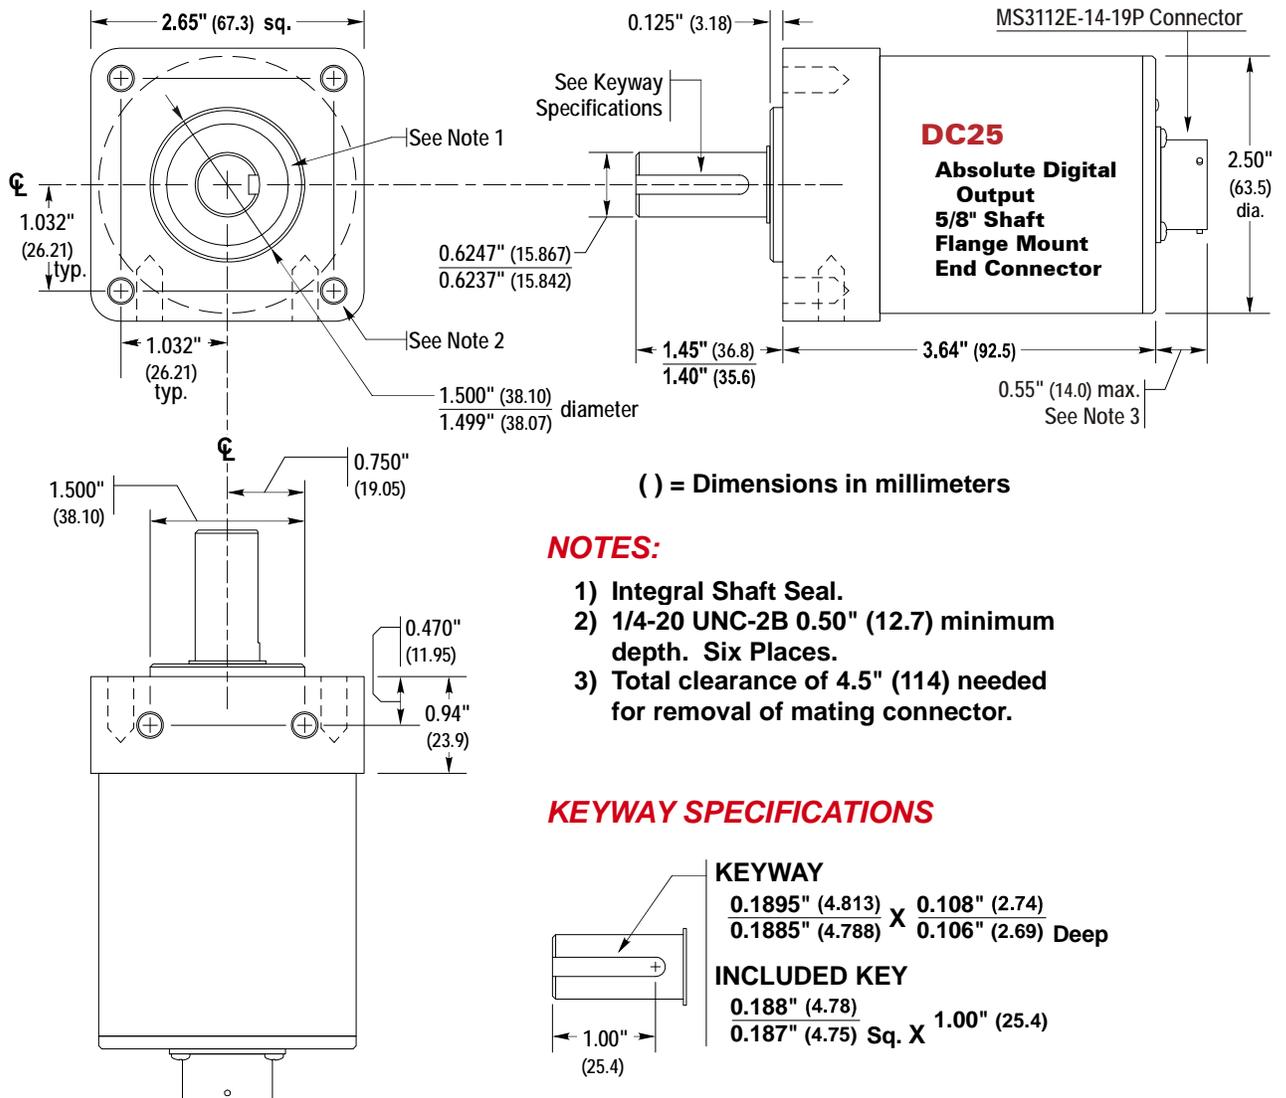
5/8" Shaft, Face Mount, End Connect Outline Drawing
